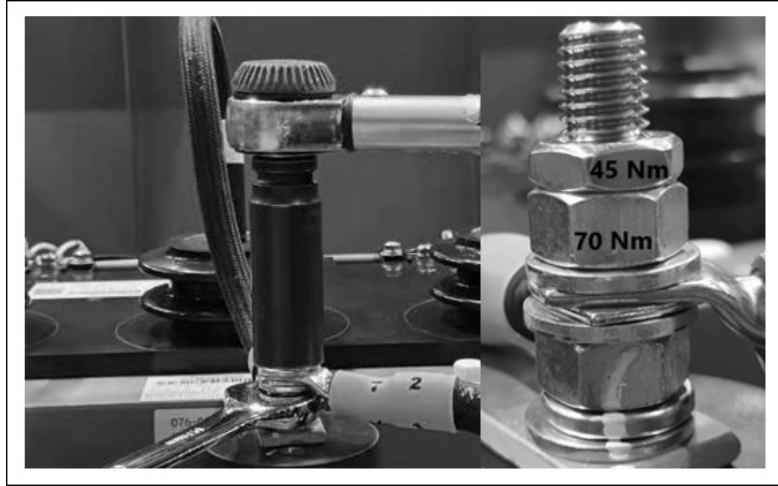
CORRECT CABLE CLAMPING (MULTIPLE CABLES)
